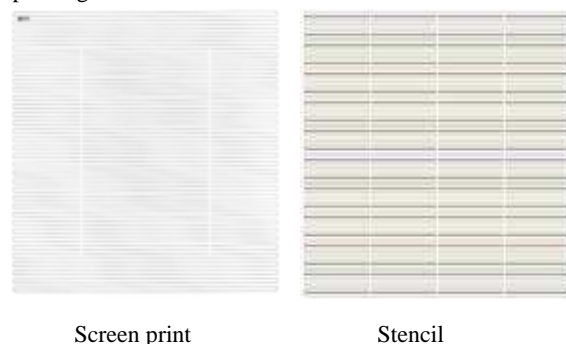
Left: Front side grid second double print step only fingers are printed; Right: stencil for printing finger, busbar in second print will connect the fingers, center remains open.
